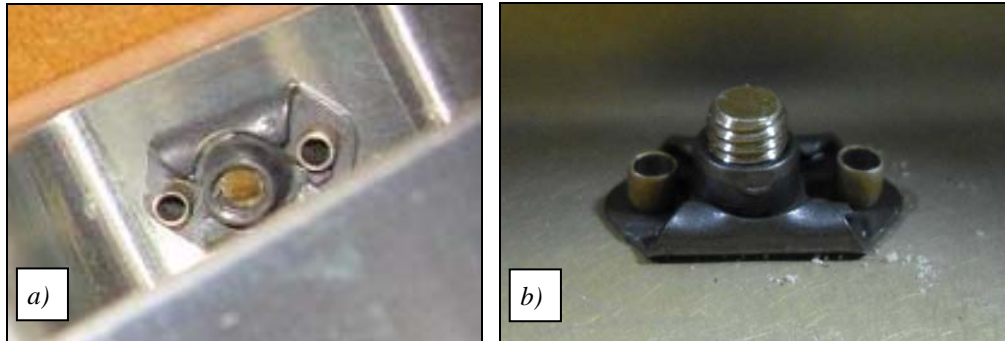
Thread engagement: *a)* inadequate thread engagement and *b)* adequate thread engagement.
